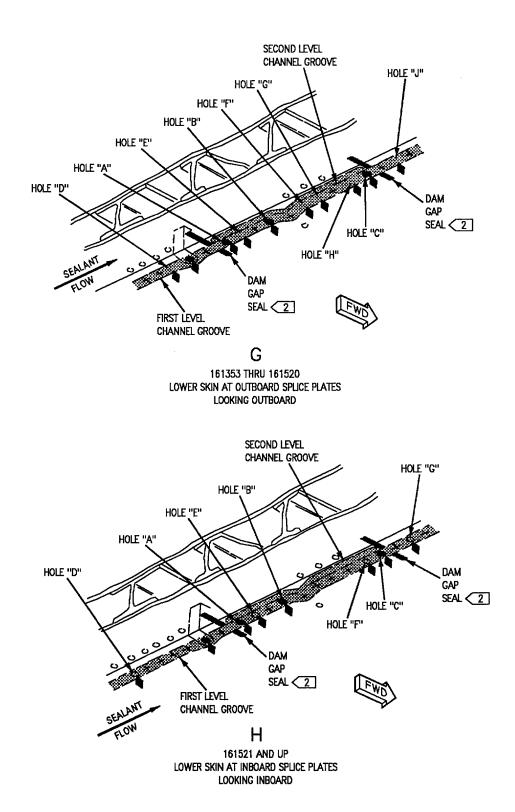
Lower Skin Channel Groove Seal Injection (Sheet 8)
